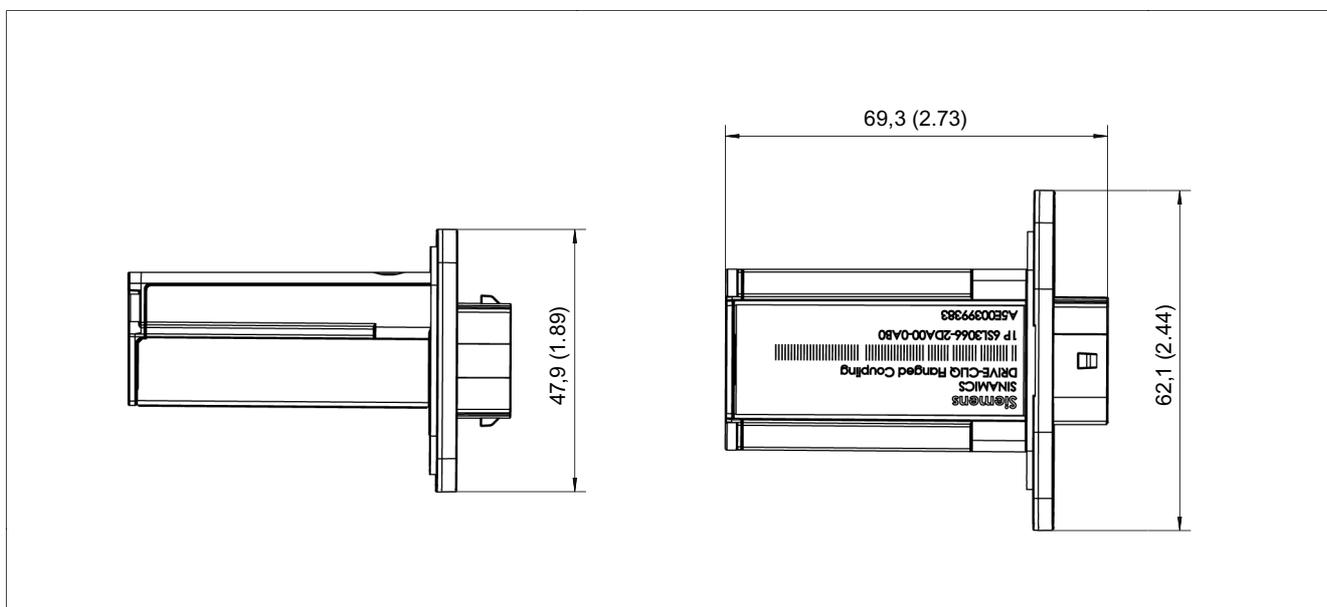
Dimension drawing of the DRIVE-CLiQ cabinet bushing, all dimensions in mm and (inches)
